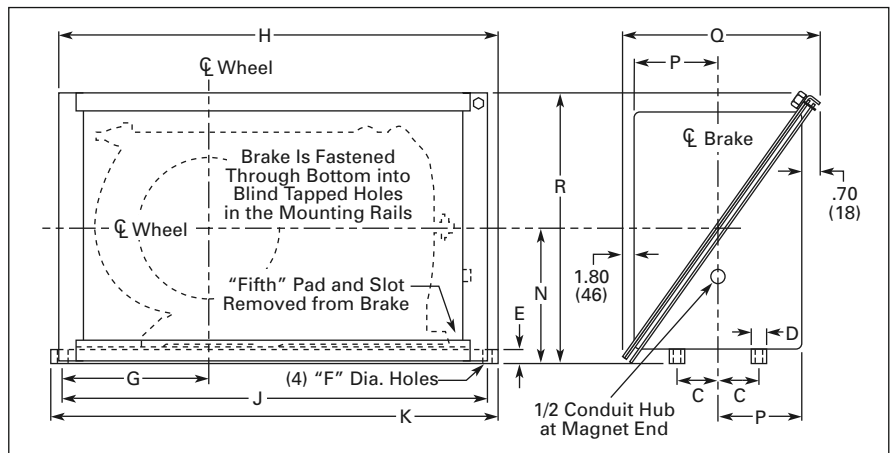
NEMA 4 Enclosure Dimensions in Inches (mm)
